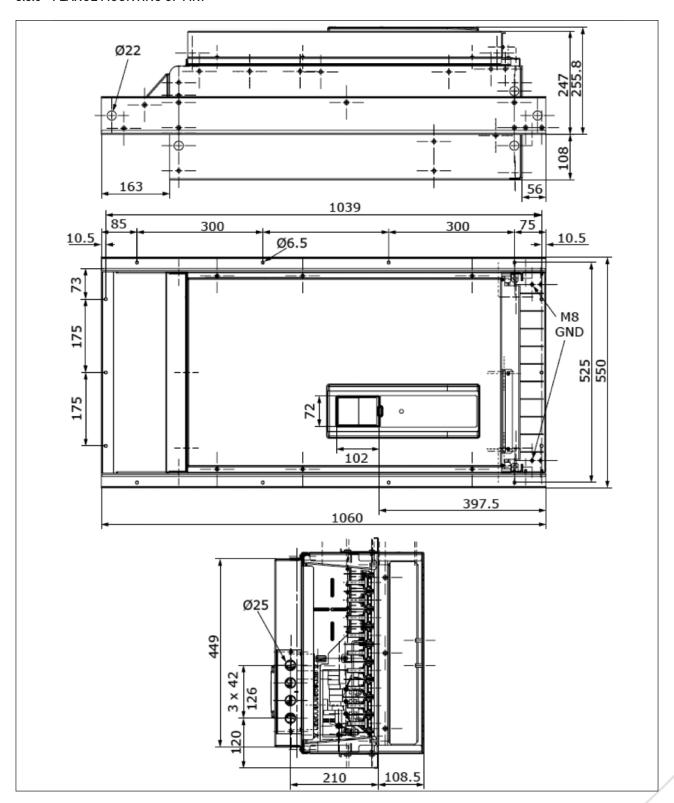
The dimensions of the AC drive, flange mounting, MR9
